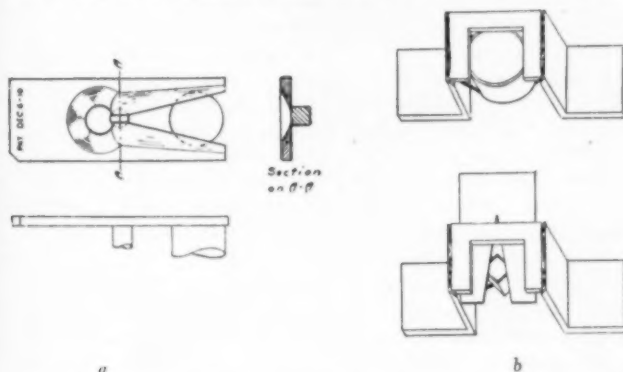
a*, MAGNETIC SPECIMEN HOLDER WITH LARGE AND SMALL SPECIMENS; *b*, NON-MAGNETIC SPECIMEN HOLDER WITH LARGE AND SMALL SPECIMENS
